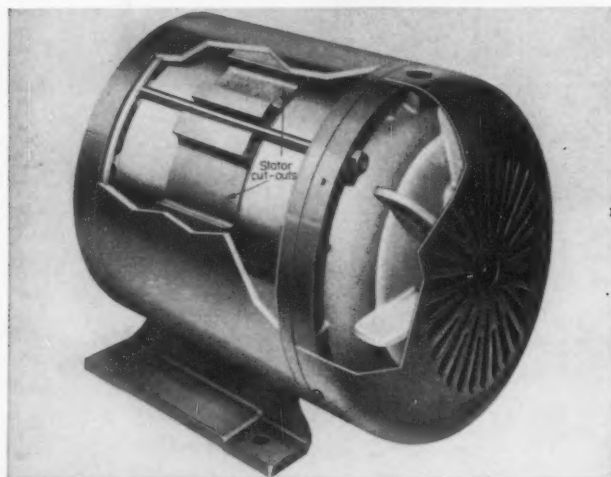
Totally enclosed and fan-cooled, this motor has particularly smooth exterior lines. Cut outs in stator laminations provide large air ducts to make cooling easy (Howell Electric Motors Co.)
